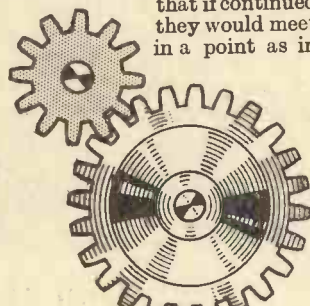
Spur gear wheel and pinion giving a ratio of 1:2.
